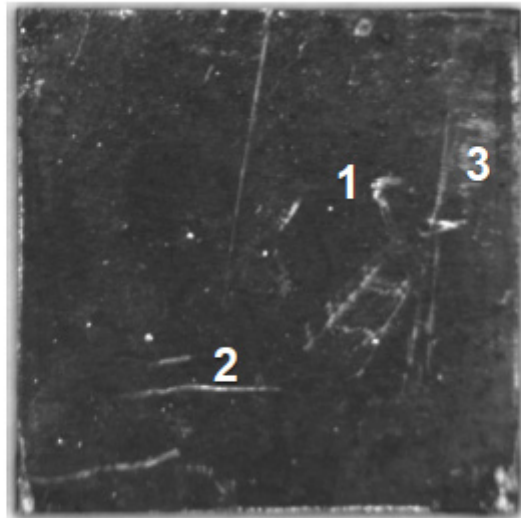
IFA-727.1: Macrograph of specimen Plate 1 side B 316L
